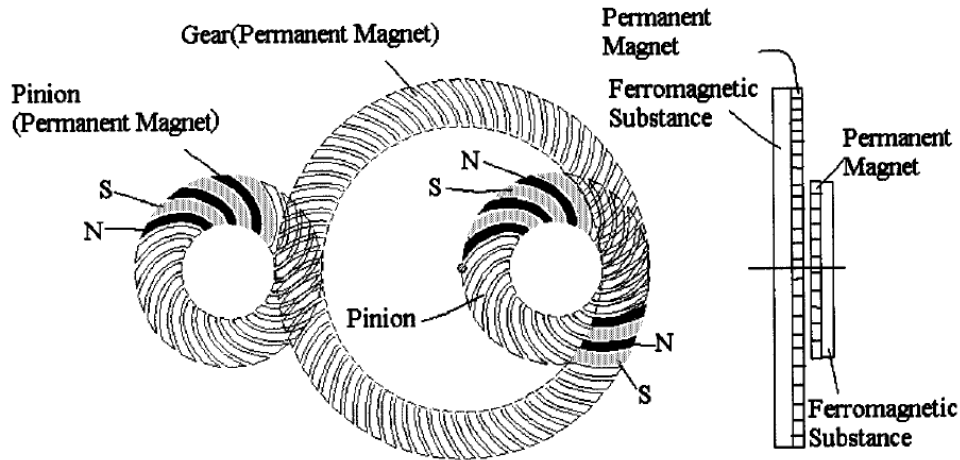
Axial-Flux Disk-Type Spur Magnetic Gear
